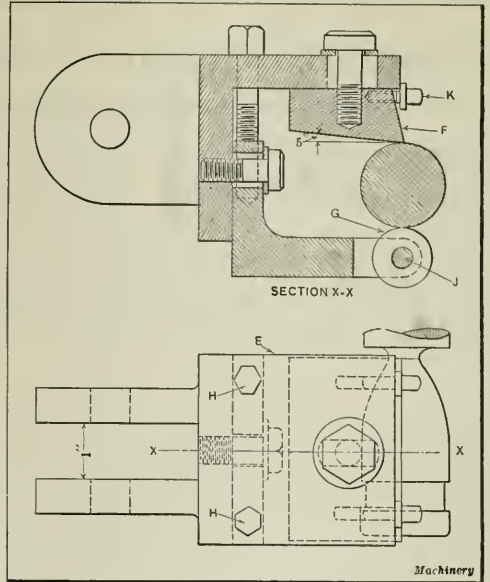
Forming Tool used in Holder shown in Fig. 1
